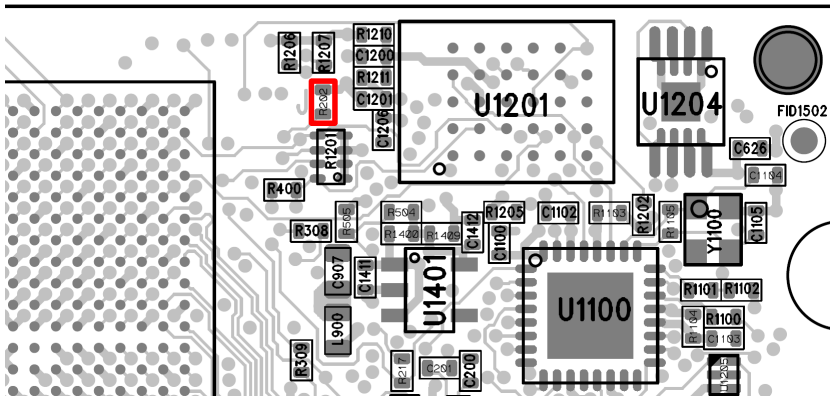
JTAG Boot Mode Resistor - Assembly Drawing Top View (top right part) for Revision 3 Modules
